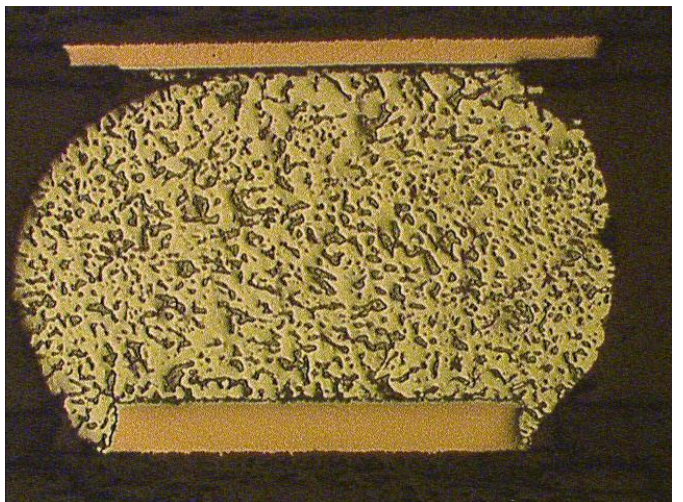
PBGA-225 Solder Joints, Board 106, Component U55, SN100C/SnPb, Failed @ 1064 Cycles
